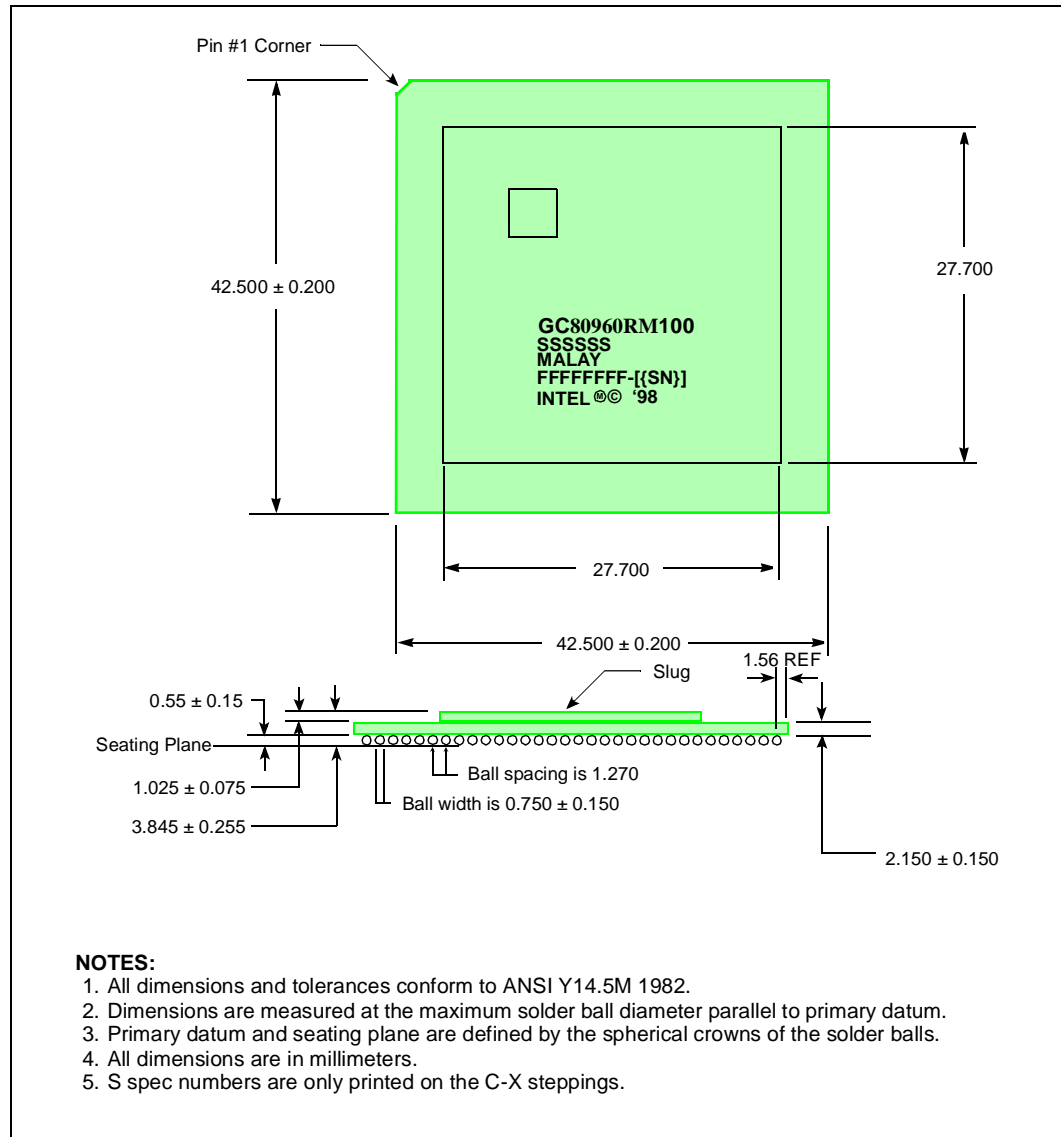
540L H-PBGA Package Diagram (Bottom View)
